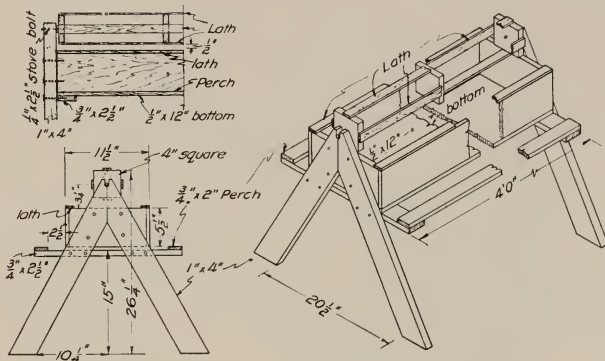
Plan for the construction of hopper shown in figure 79.
